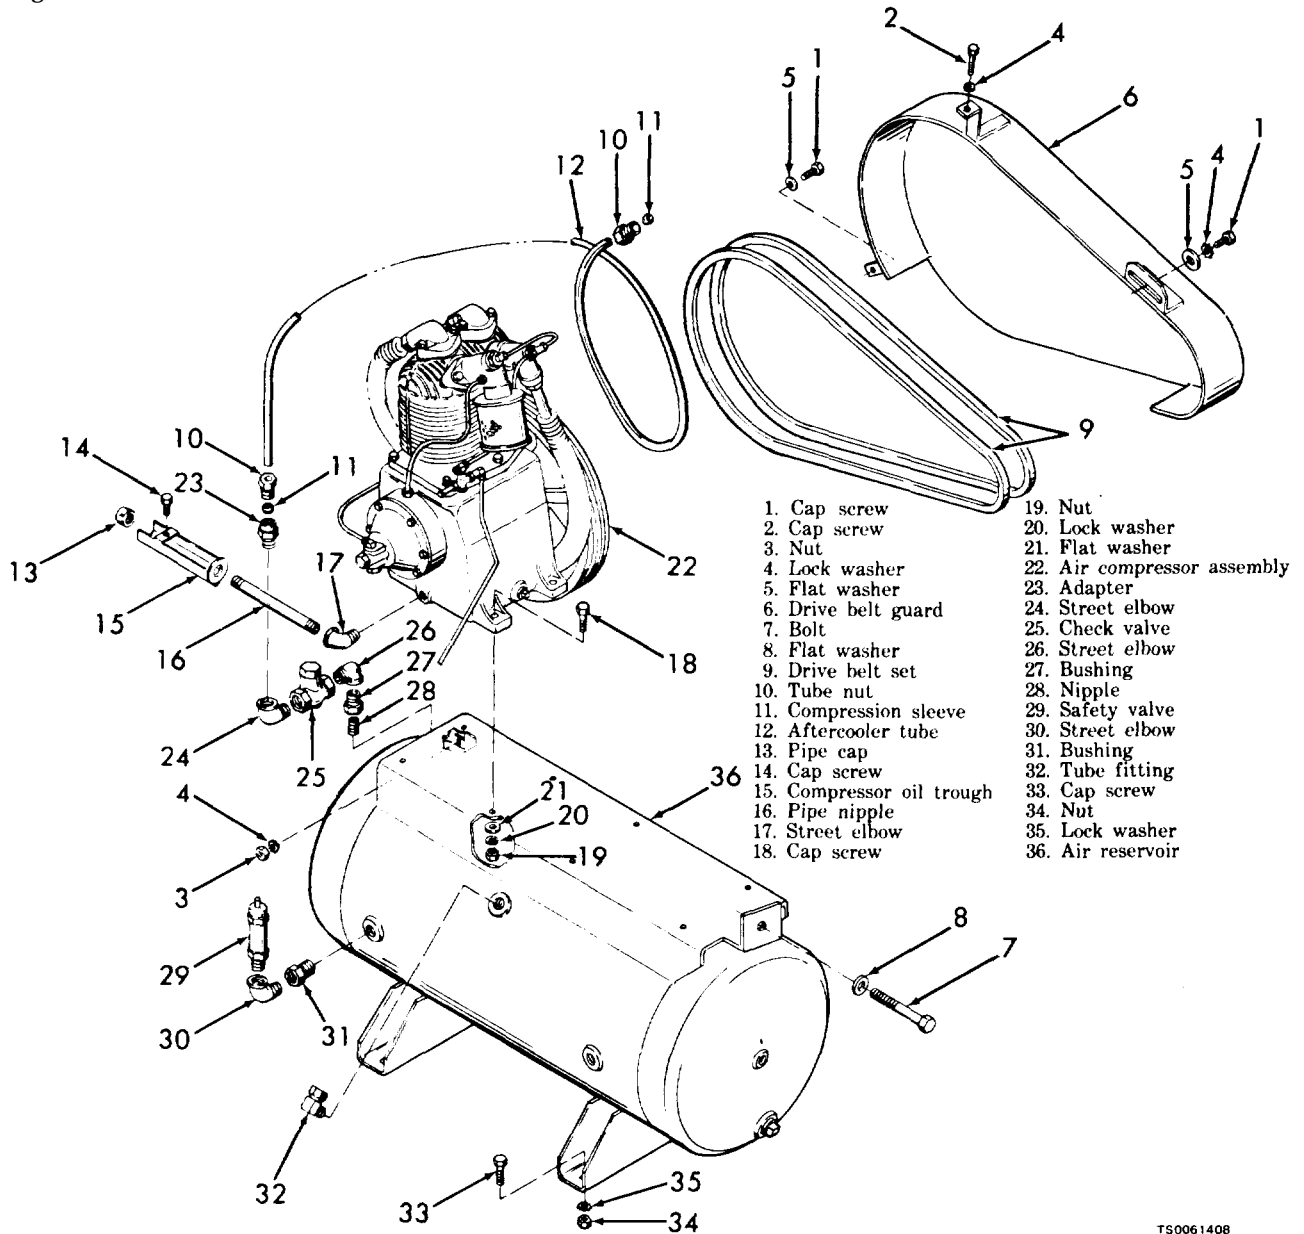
Air compressor, reservoir, and drive belt, exploded view.
